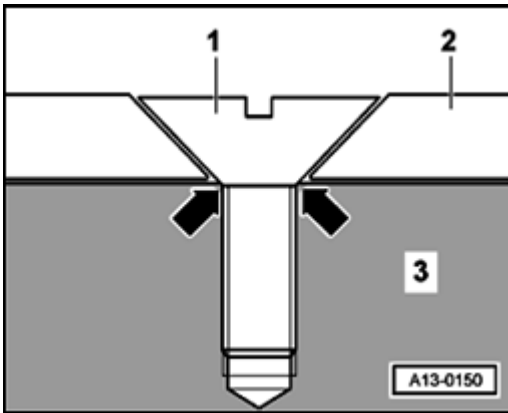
Identifying Attachment Points, Countersunk Screws, Crankshaft & Sensor Wheel
